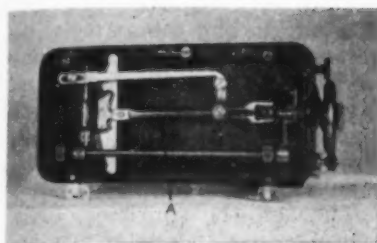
Lower side of the bed-plate of a long-lever shuttle-type machine. A is the long lever.
